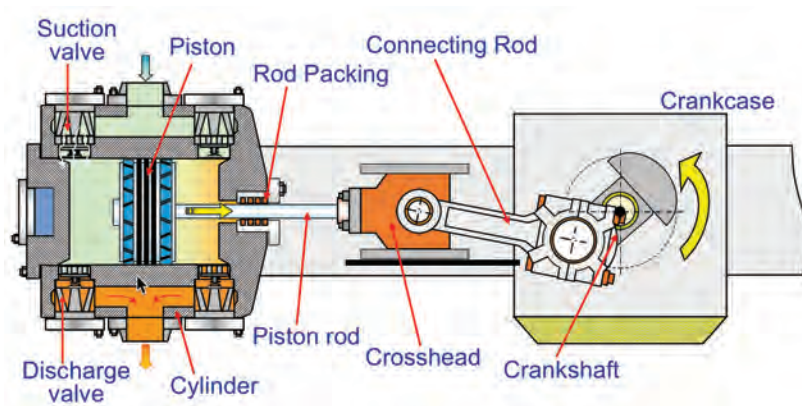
Cross-sectional view of a typical double-acting separable reciprocating compressor (courtesy of GE Oil and Gas).
